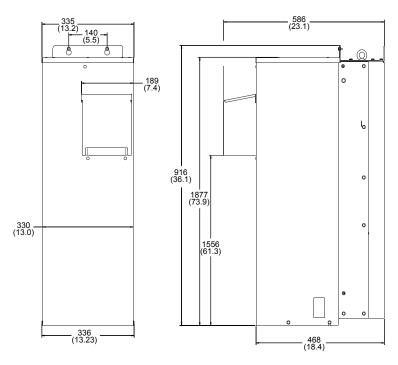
Exterior dimensions for D1h with NEMA 3R Kit (9K715)
